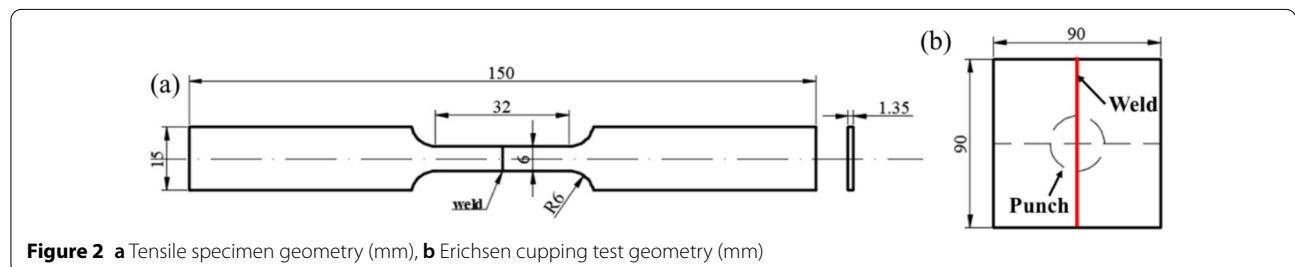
a Tensile specimen geometry (mm), b Erichsen cupping test geometry (mm)
